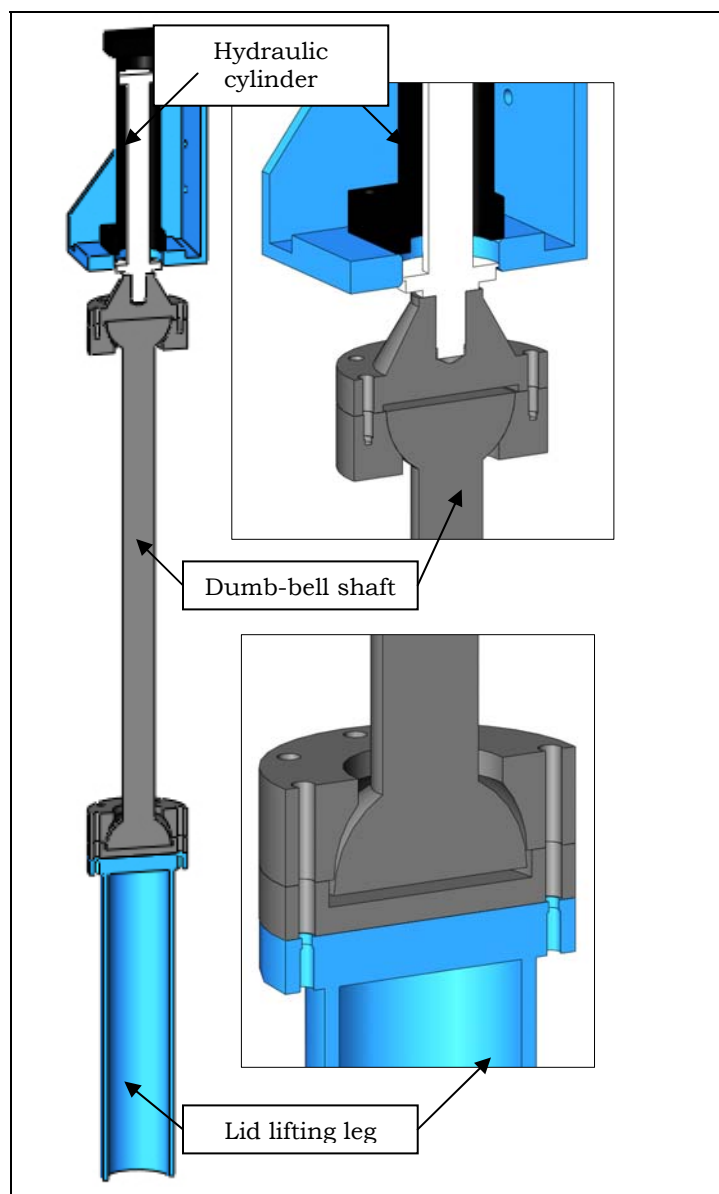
Sectional view of Vacuum chamber lid lifting system
